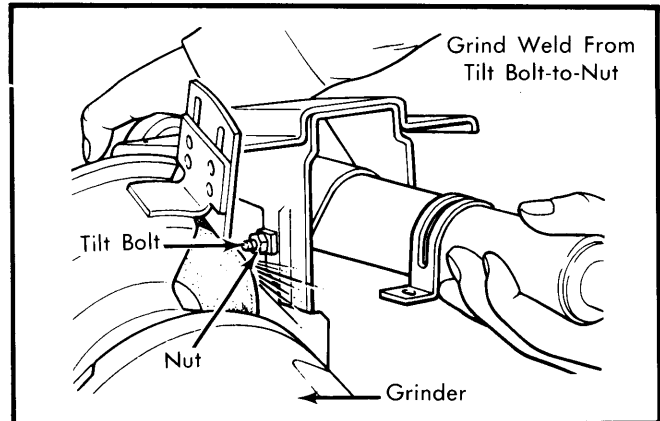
Grinding Weld Joining Tilt Bolt to Nut (Challenger & Sapporo Only)
